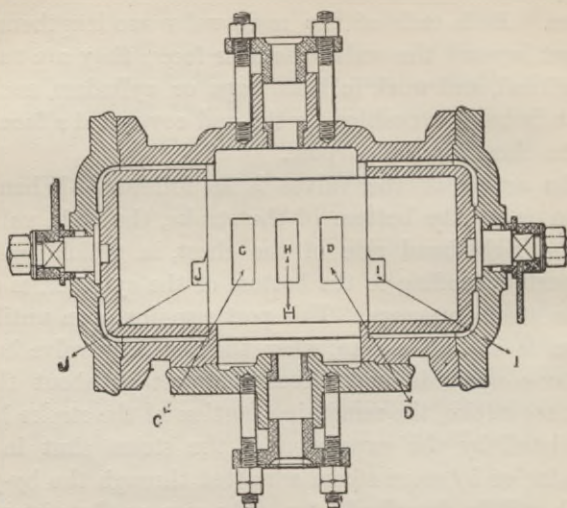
Sectional Front Elevation of Valve Chest, the Valves being removed.
